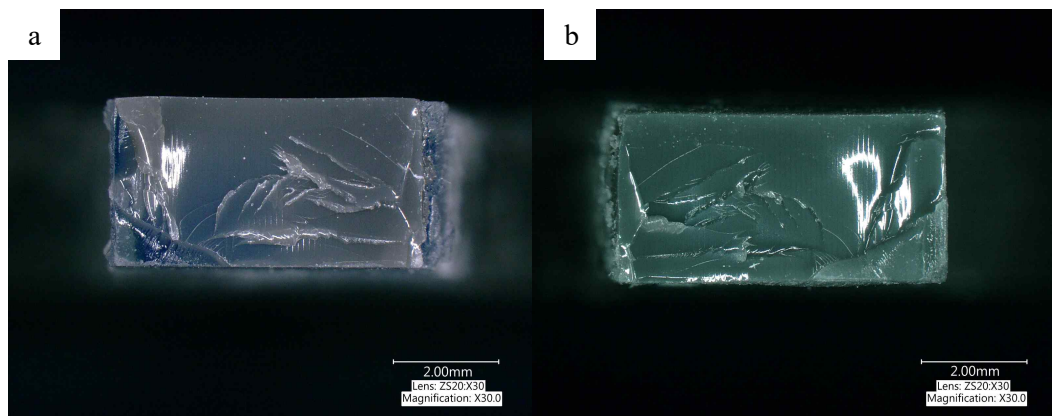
Polymer welded clear-flexible specimens after tensile testing (a) clear half and (b) flexible half.
